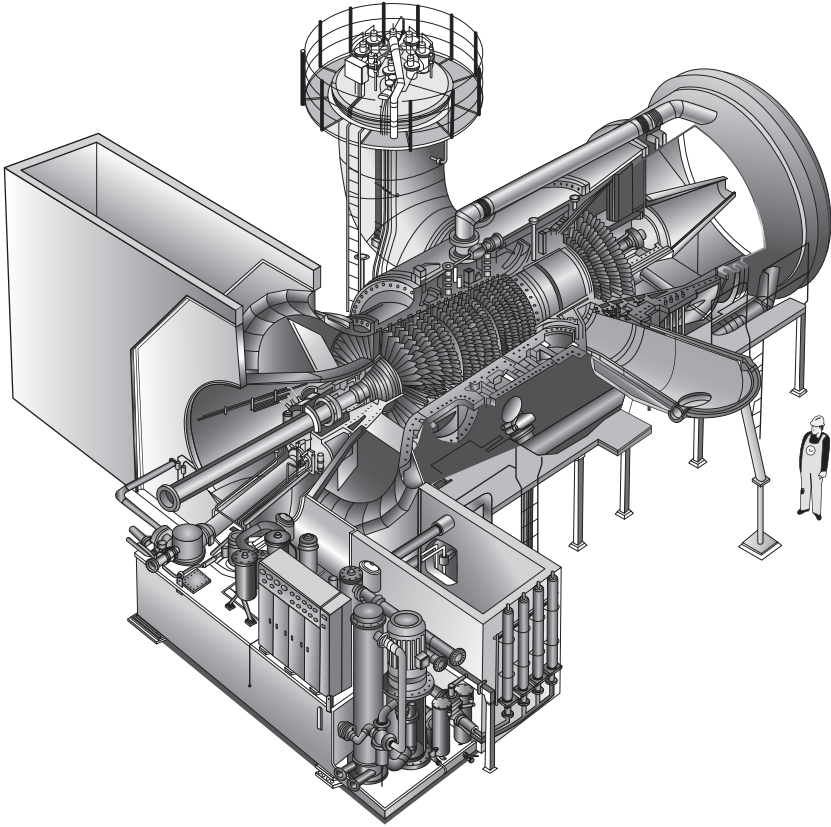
A large frame-type gas turbine with two silo-type side combustors.
